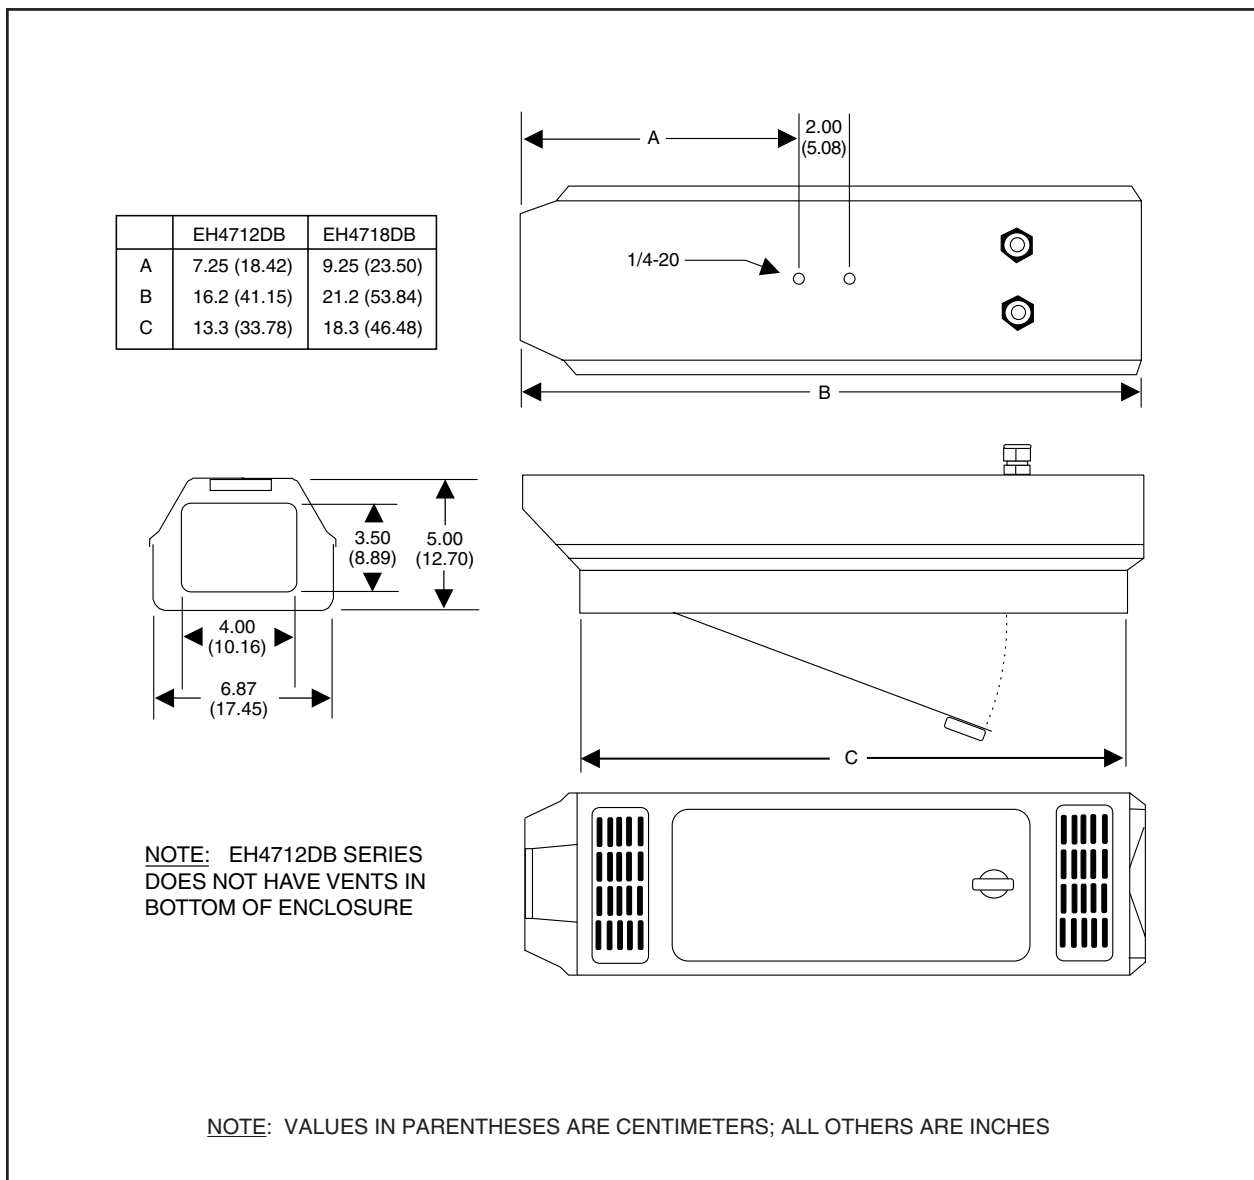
EH4712DB/EH4718DB Dimension Drawing
